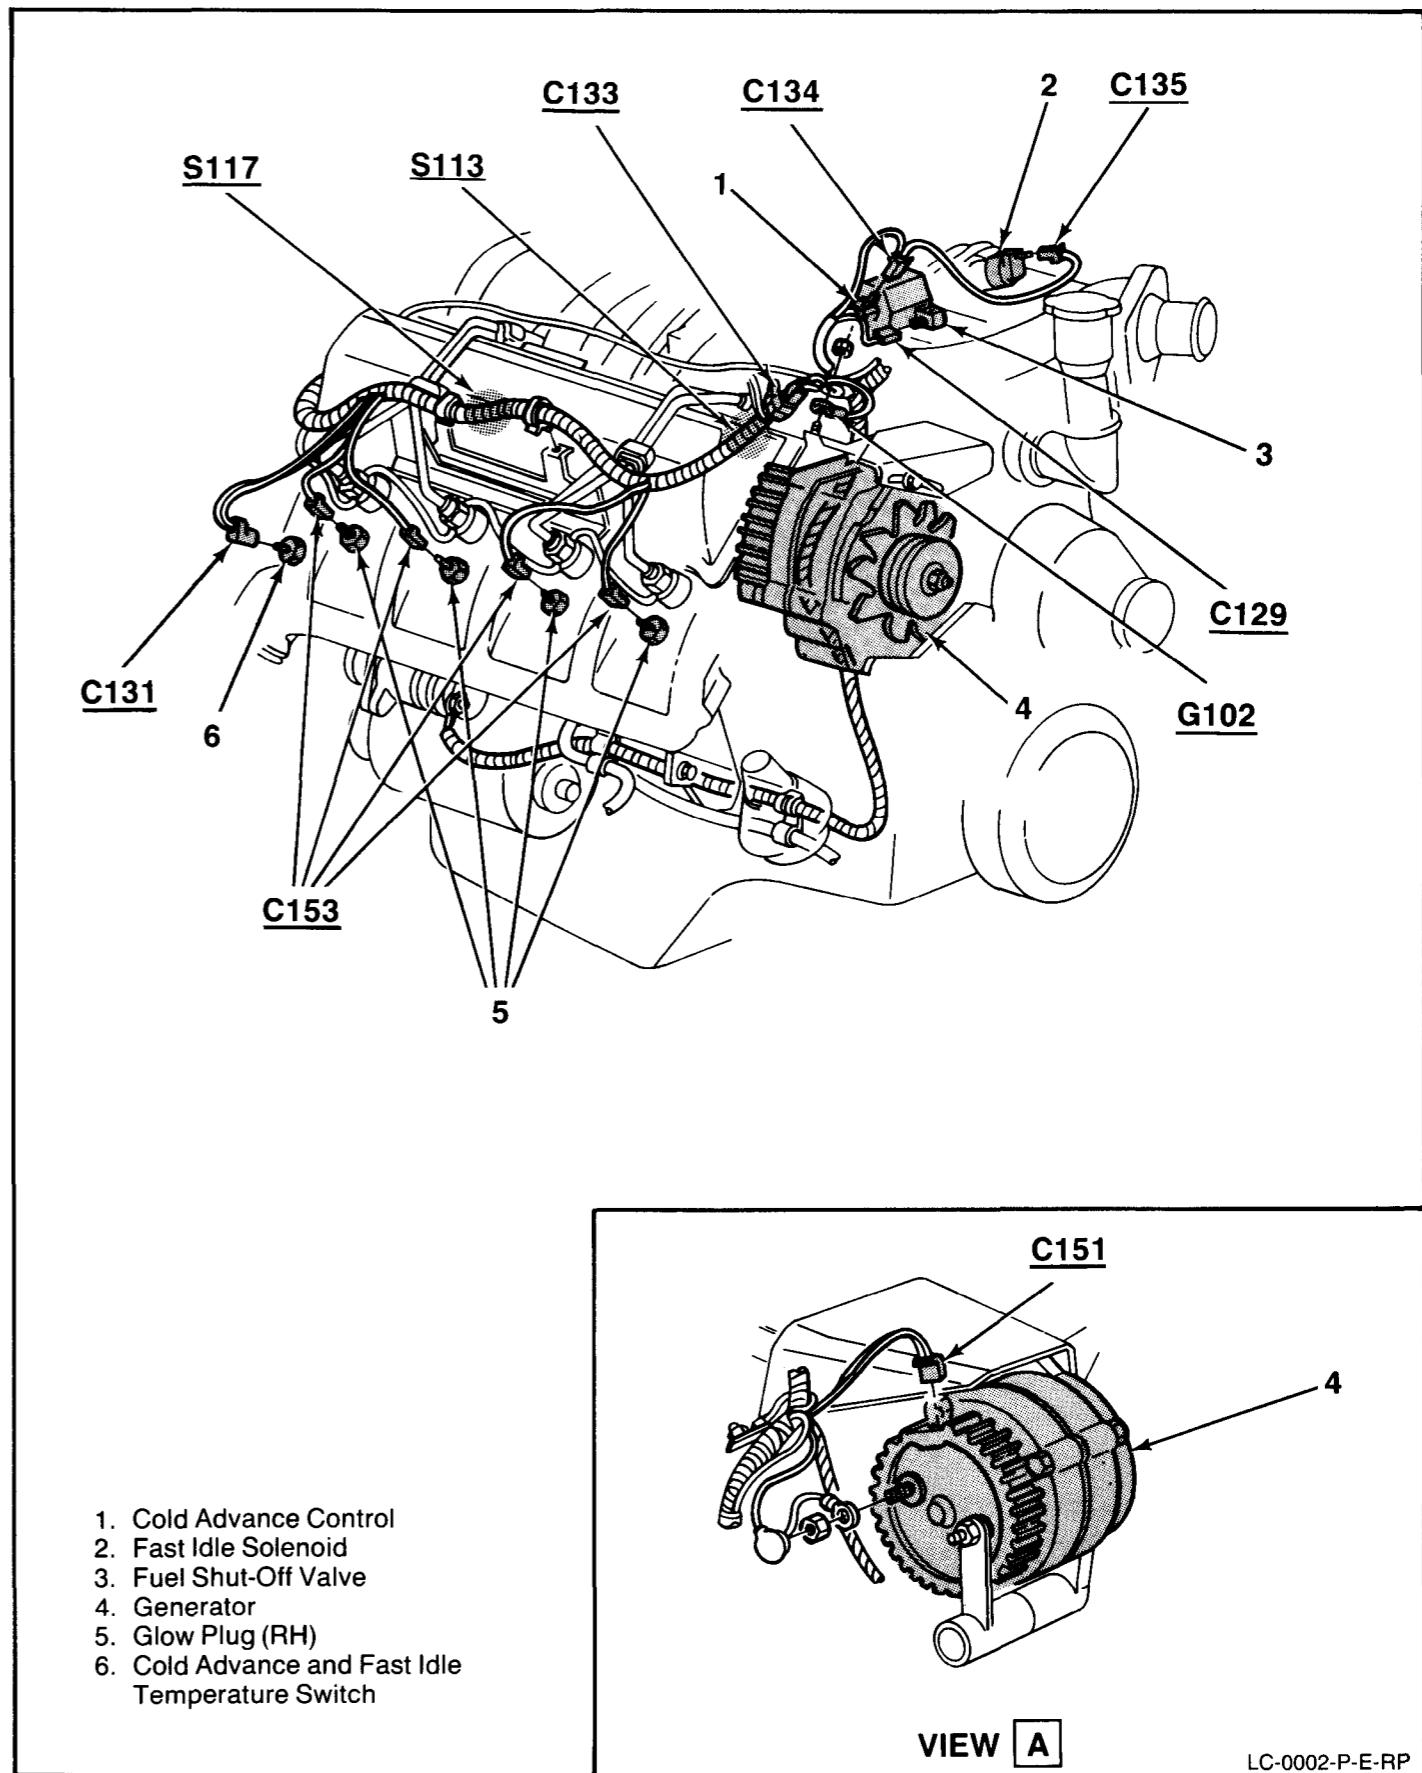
Engine Wiring Harness — Right Side (RPO LL4)
